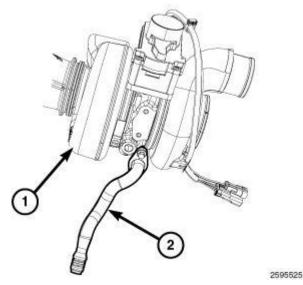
Turbocharger & Drain Tube Courtesy of CHRYSLER GROUP, LLC
